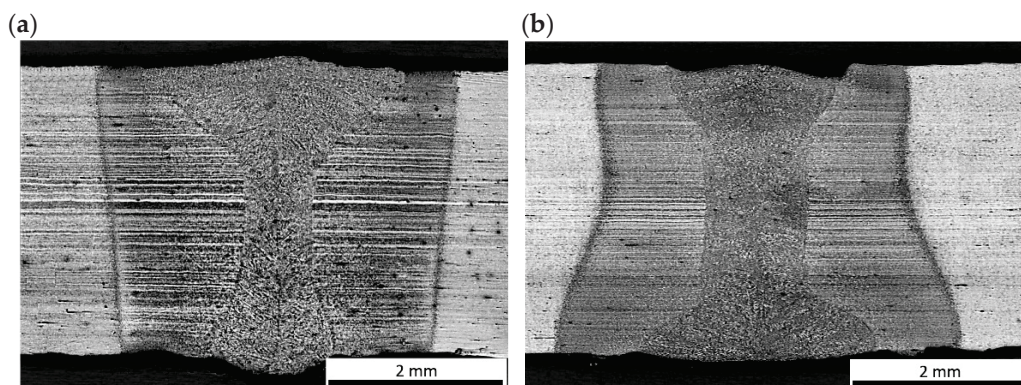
Comparison of the shape of fusion zone of welds produced during bead-on-plate laser welding at constant energy input of 90 J/mm, but different laser output power and welding speed (Table 3); (a) B7, laser output power 1.5 kW, welding speed 1.0 m/min; and (b) B8, laser output power 3.0 kW, welding speed 2.0 m/min.
